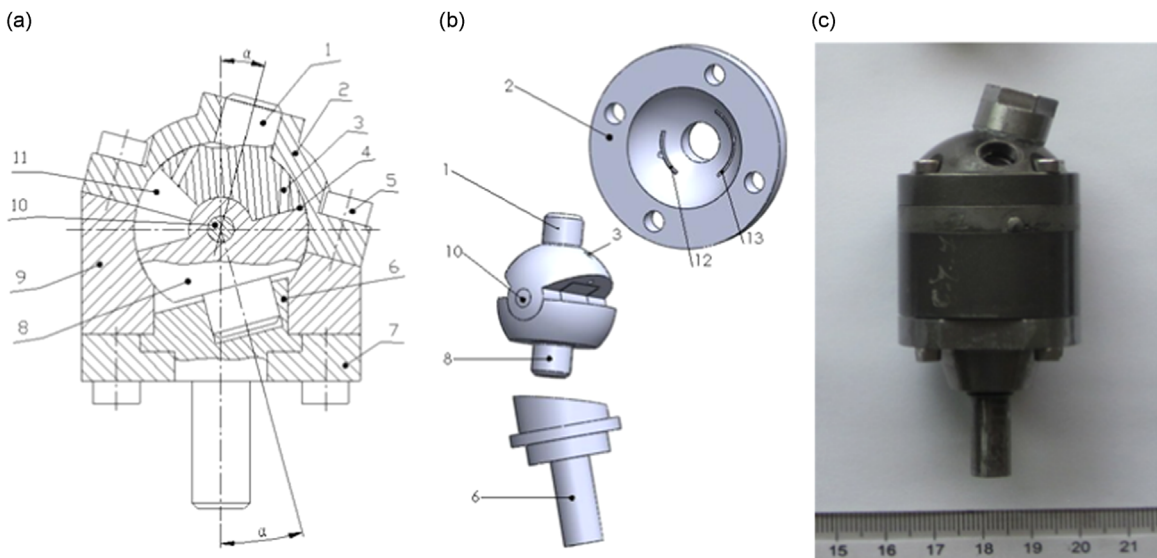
Spherical pump (a) sectional schematic (b) 3D view (c) prototype.
